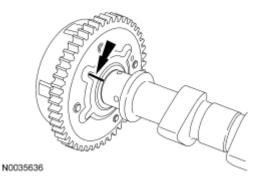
Locating Marks On Camshaft Phaser Courtesy of FORD MOTOR CO.
